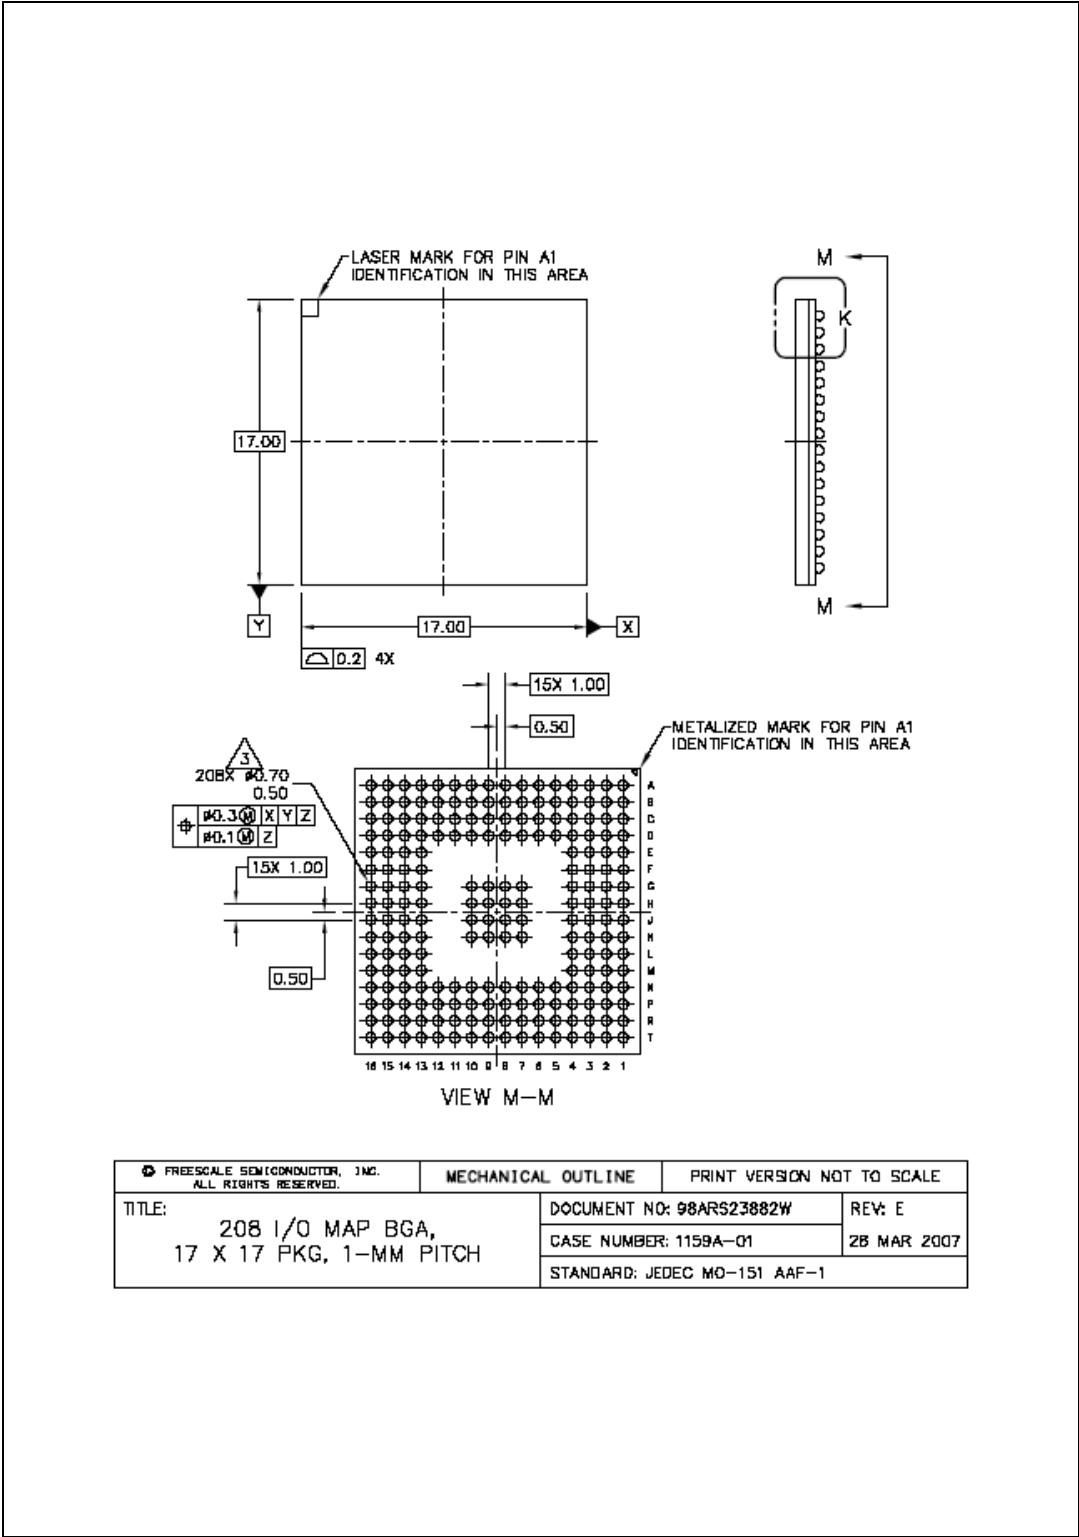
208 MAPBGA package mechanical drawing (1 of 2)
